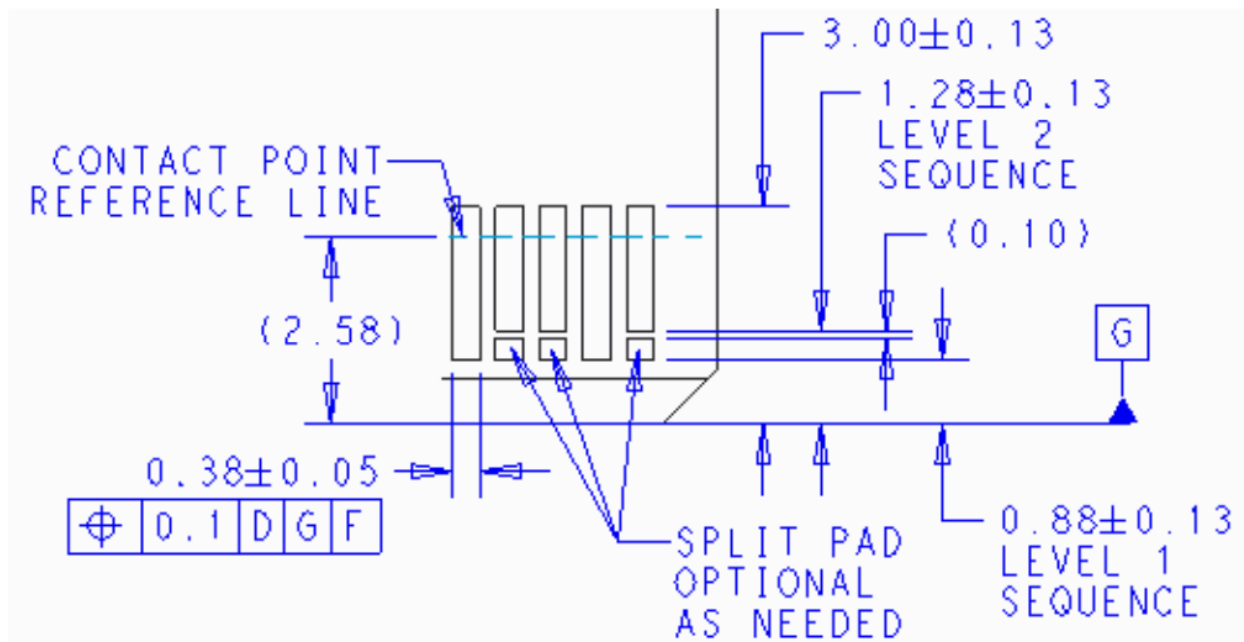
LFF Gold Finger Dimensions – x32 – Top Side (“B” Pins)
